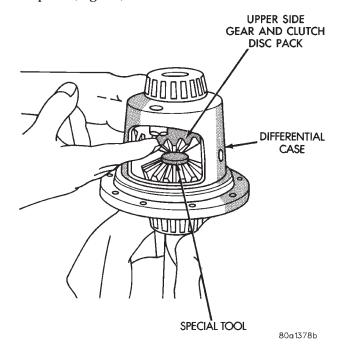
Upper Side Gear & Clutch Disc Pack Installation
